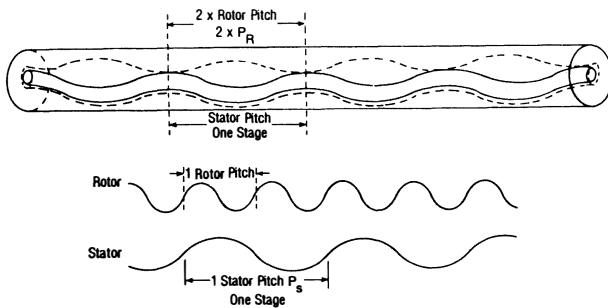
A half-lobe PDM showing the stator and rotor pitches.
